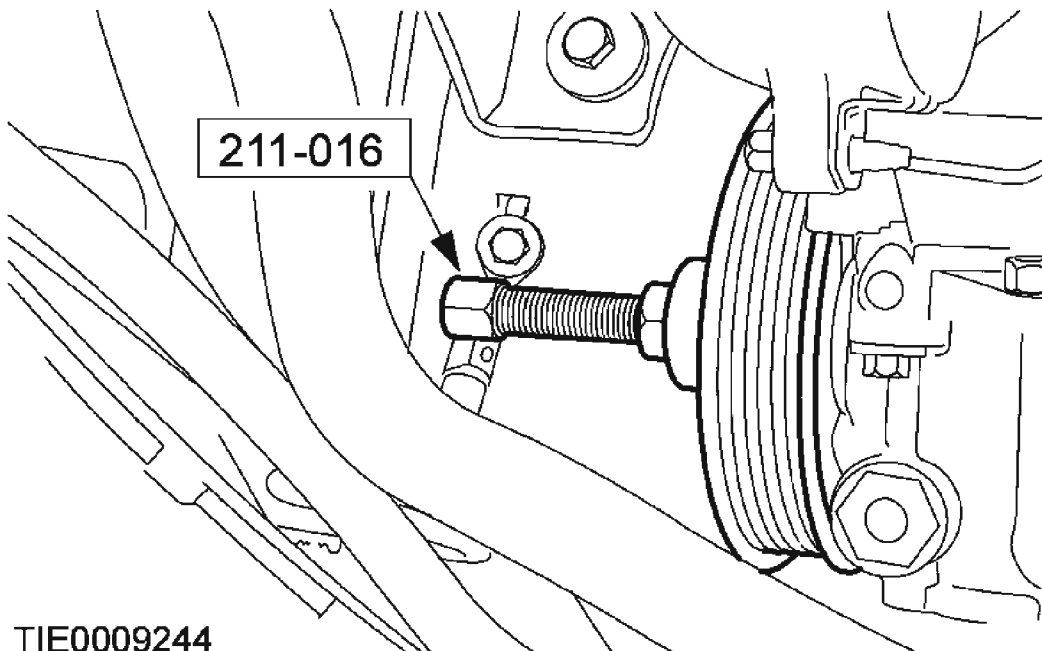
Removing Power Steering Pump Pulley Using Special Tool
